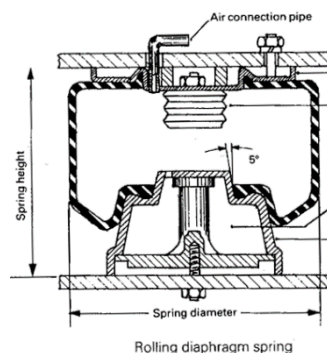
Air spring bag suspension example - rolling diaphragm spring [12]
